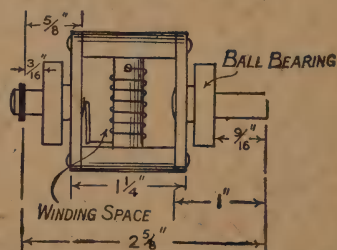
Armature of Cycle-lighting Dynamo, showing Winding and also Attachment to Insulated Contact
